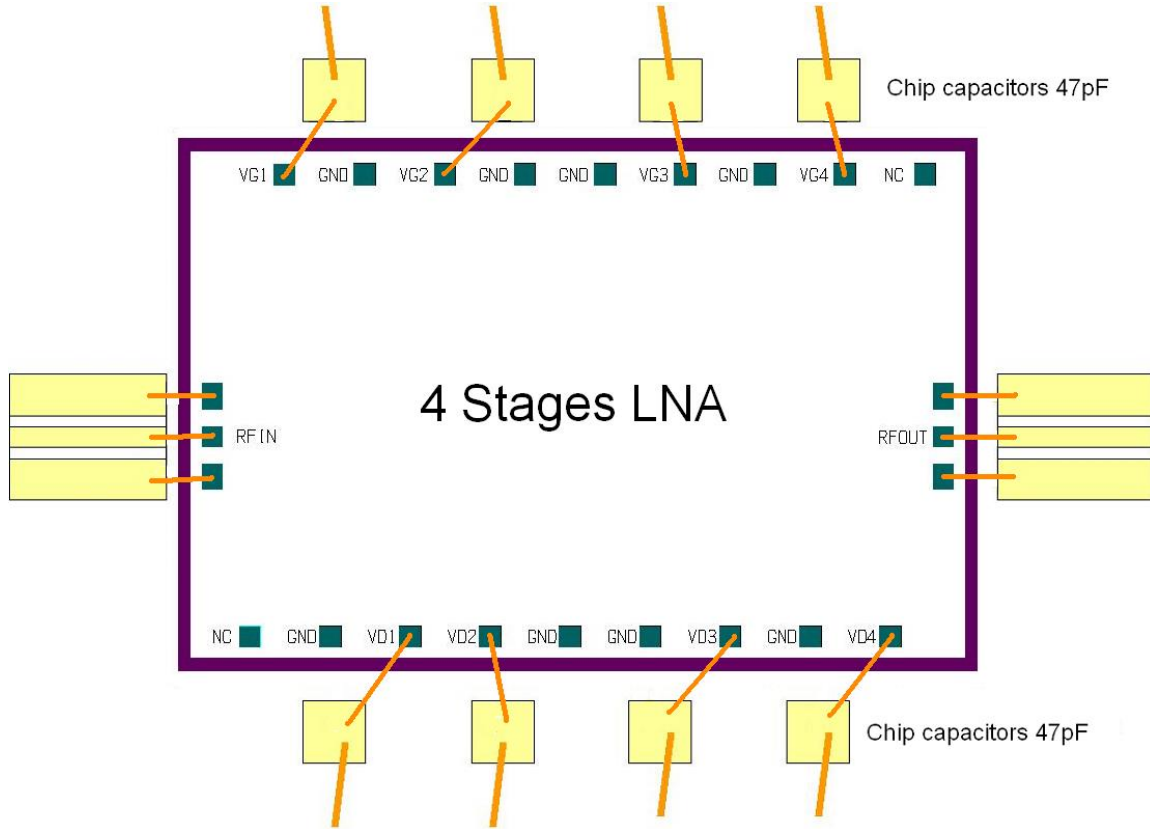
CGY2190UH/C2 die layout: coplanar assembly
